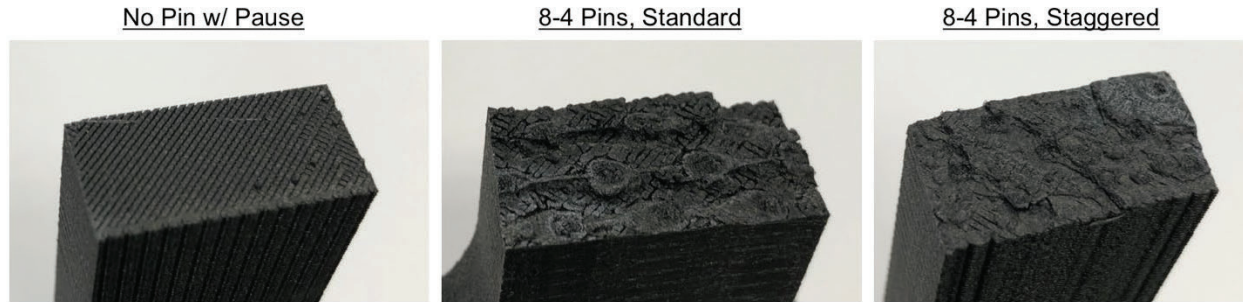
Representative fracture surfaces of tensile samples (CF-PLA).
